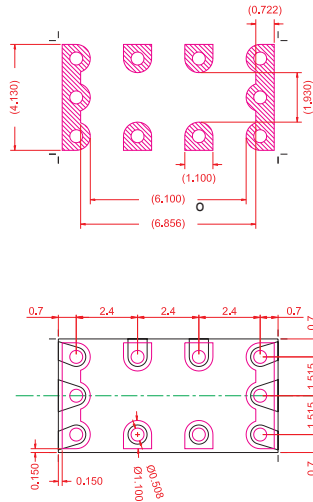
Bottom view of the CR Relay showing the solder lands and the solder masking
